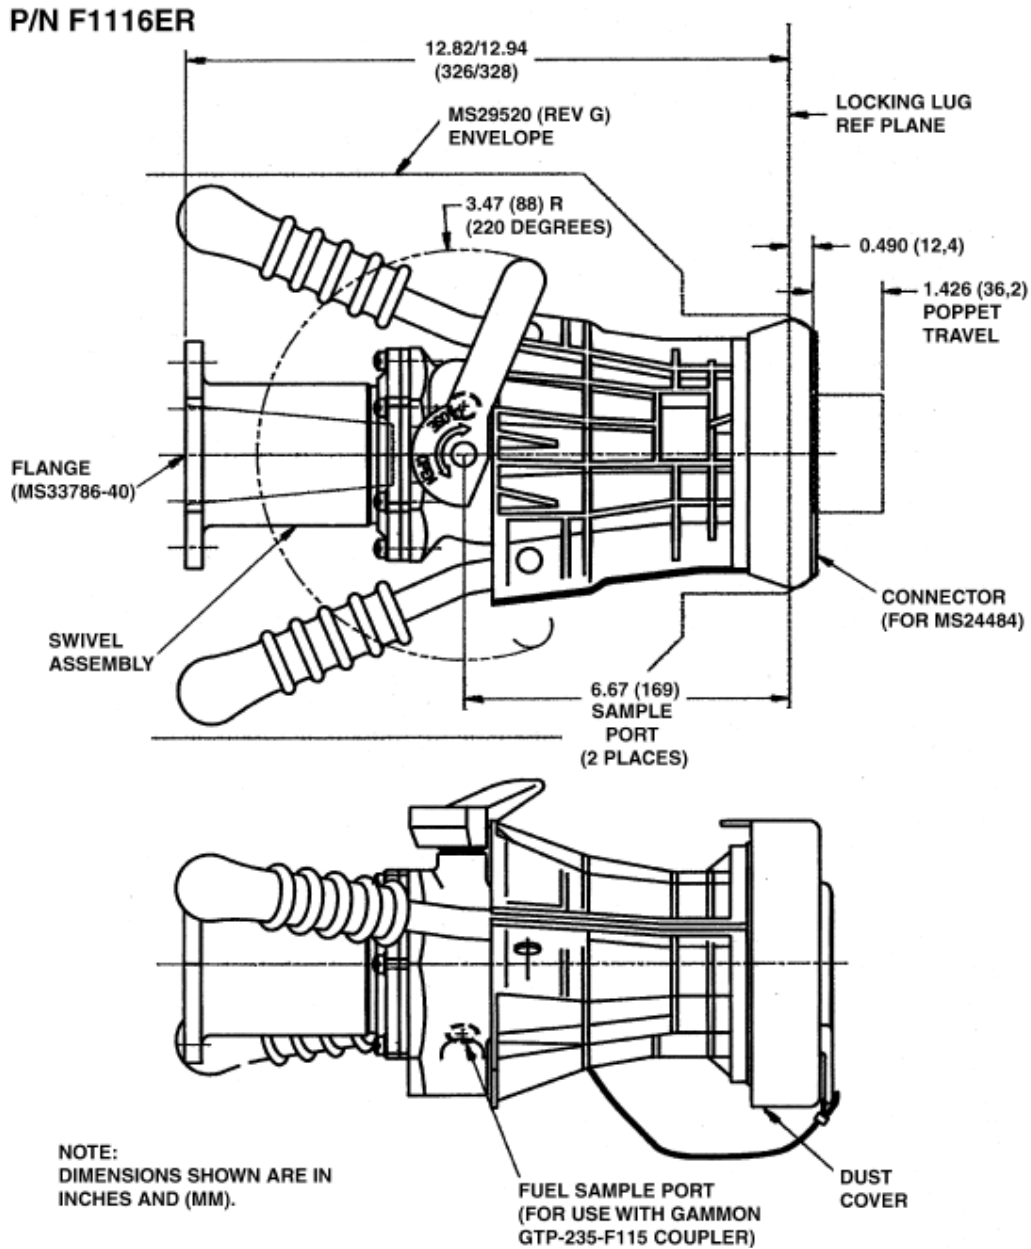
Nozzle Dimensions (Sheet 1 of 2)
